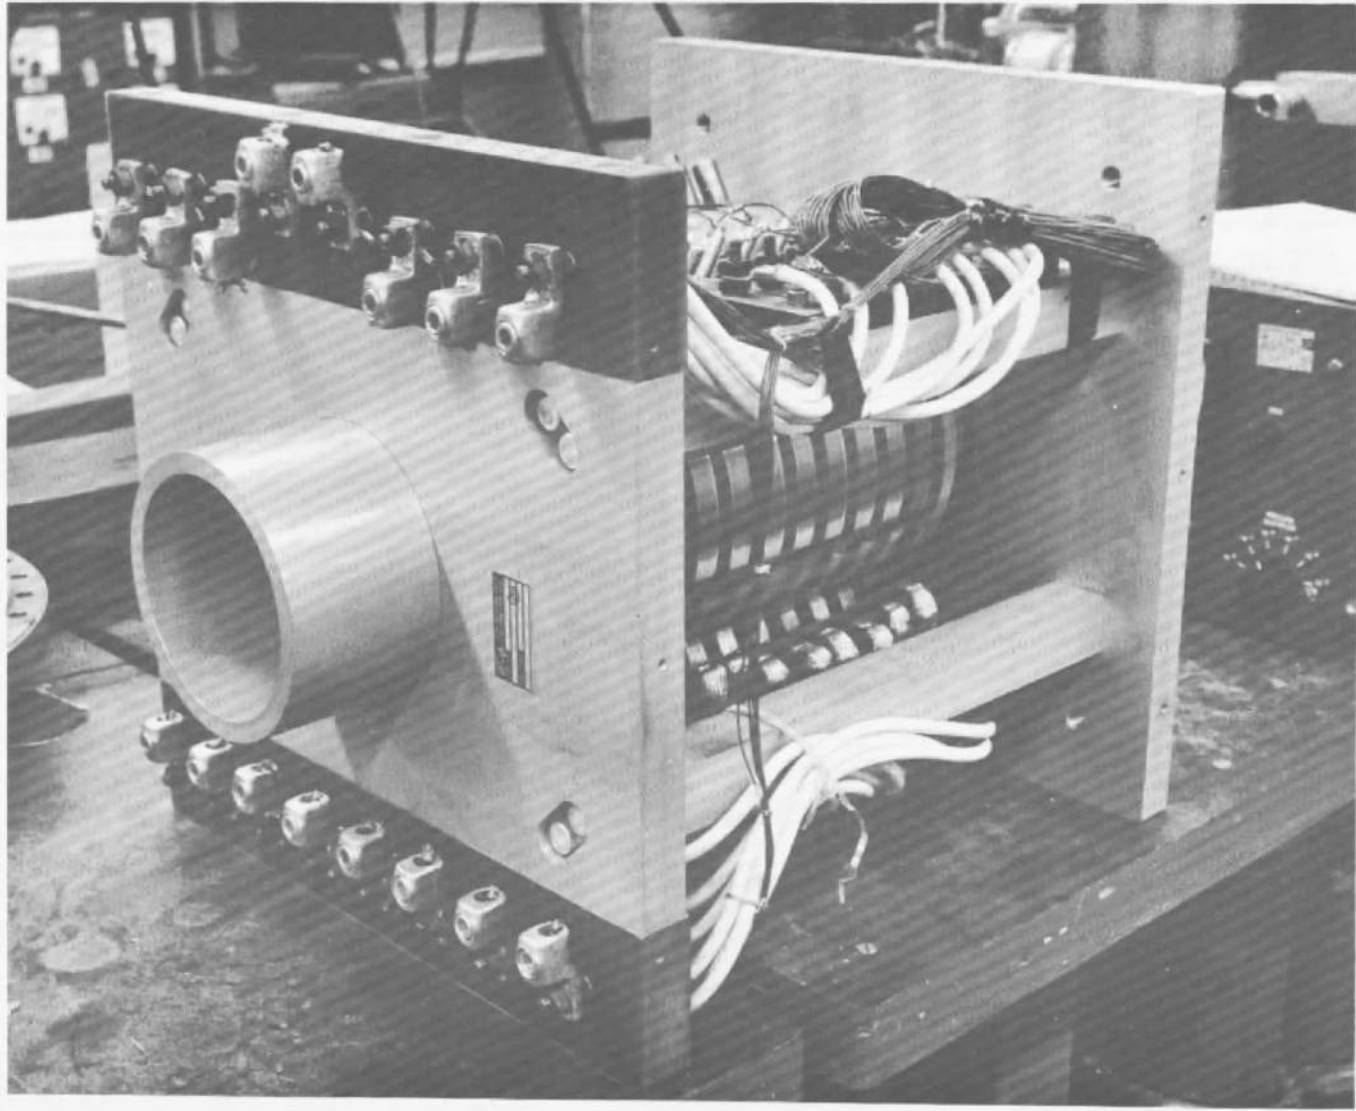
8-Ring Scaled-up Slip Ring Assembly After Testing at AEDC
